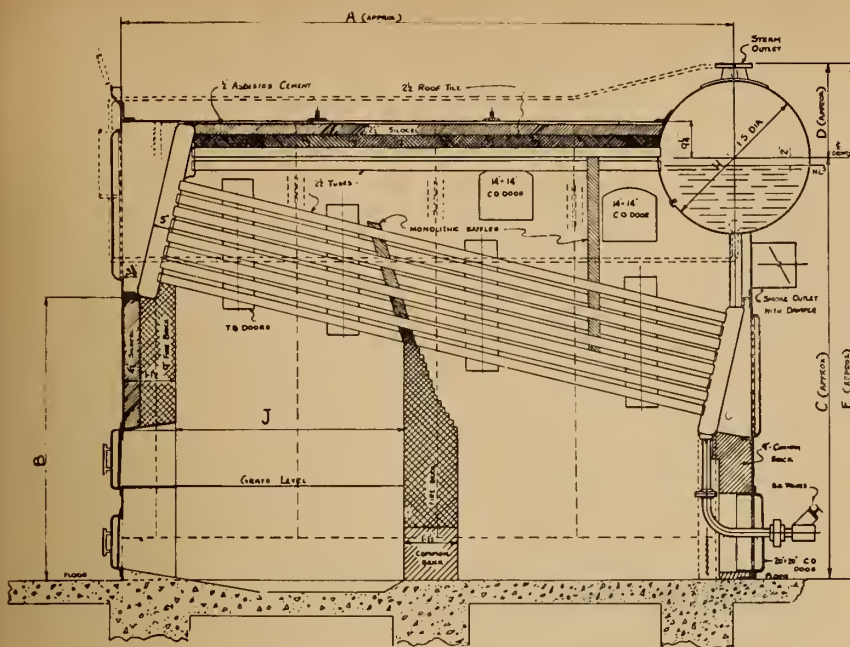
Water tube boiler, cross drum straight tube, hand fired.
